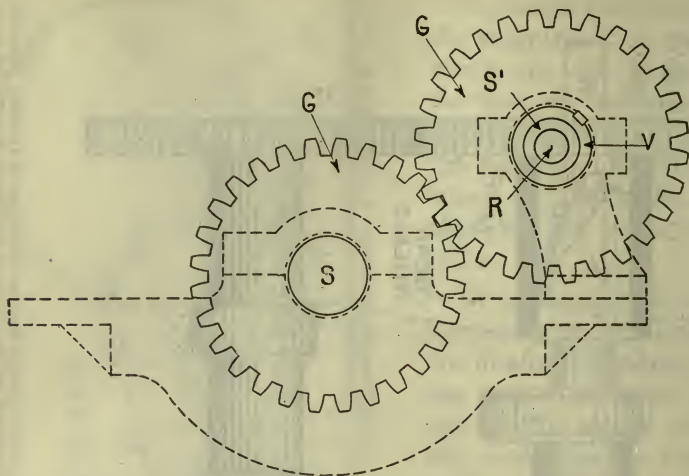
End view of fig. 543 showing the two gear wheels G , G' , which transmit motion from the main shafts to the spiral slotted sleeve V , and eccentric shaft S' . R , is the reverse rod.
